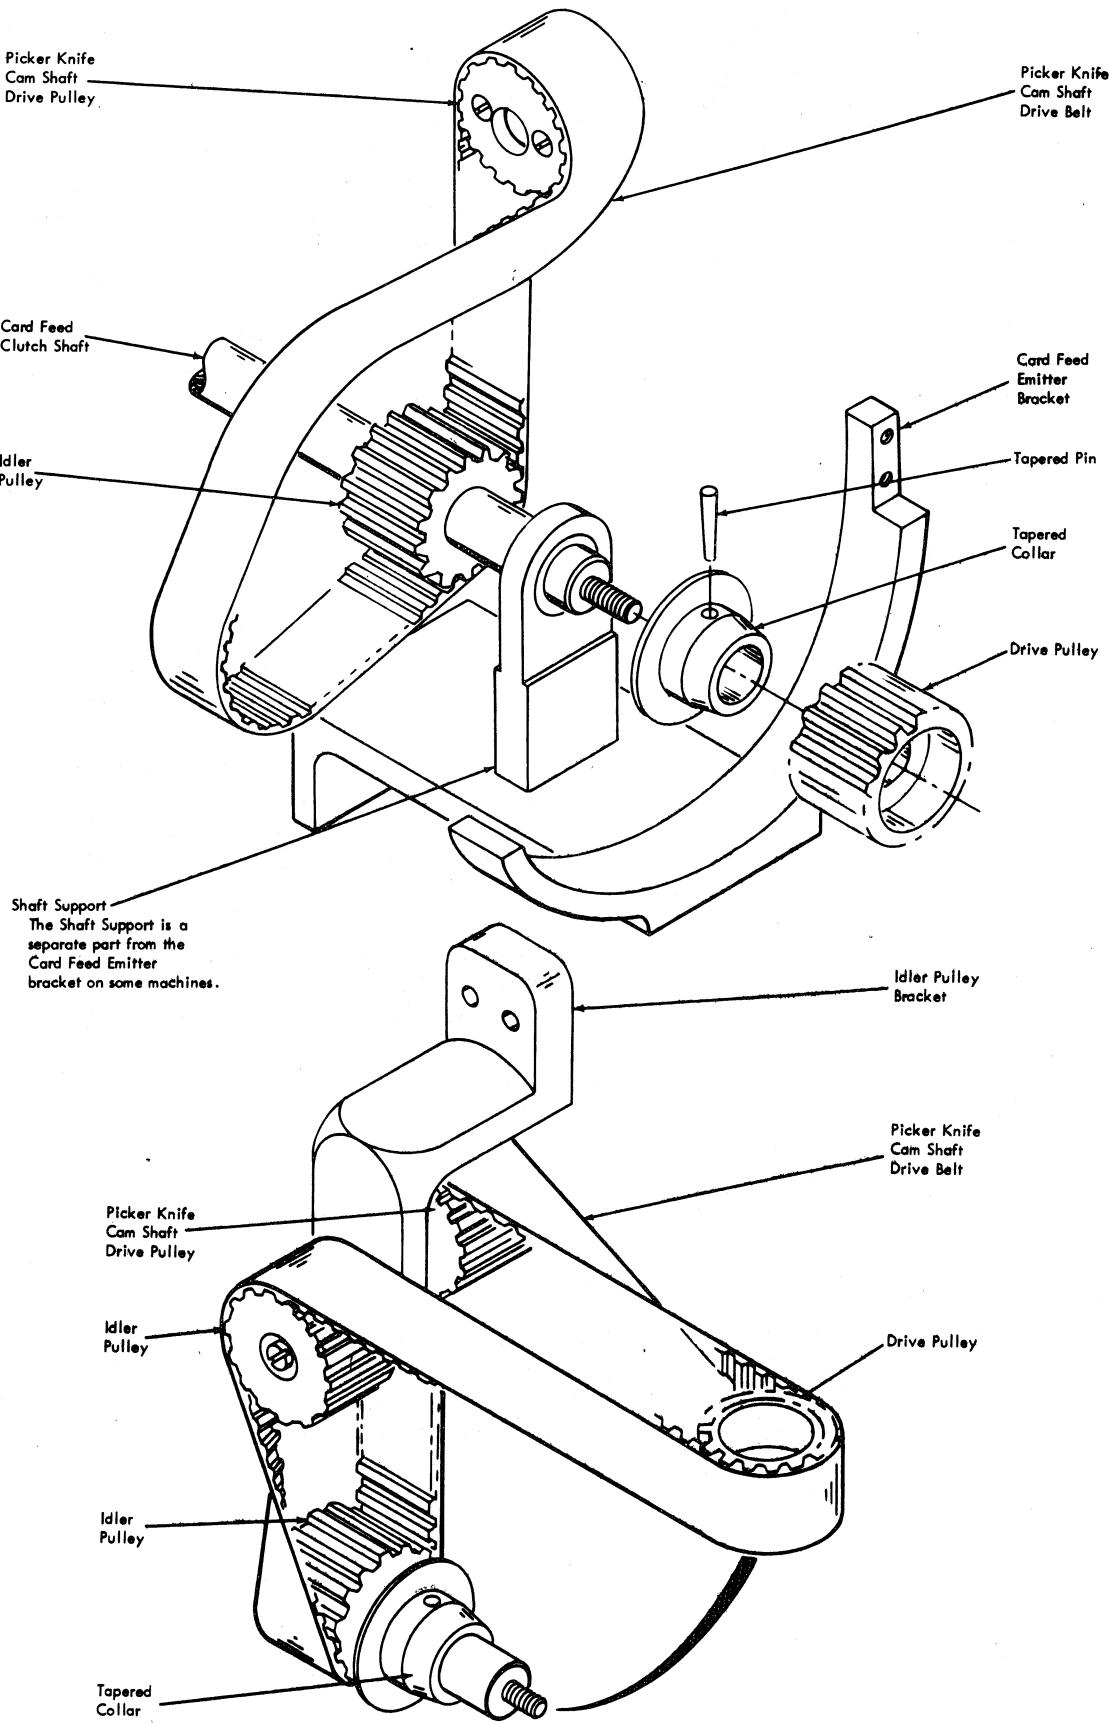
Pickerknife Camshaft Drive Belt Installation
